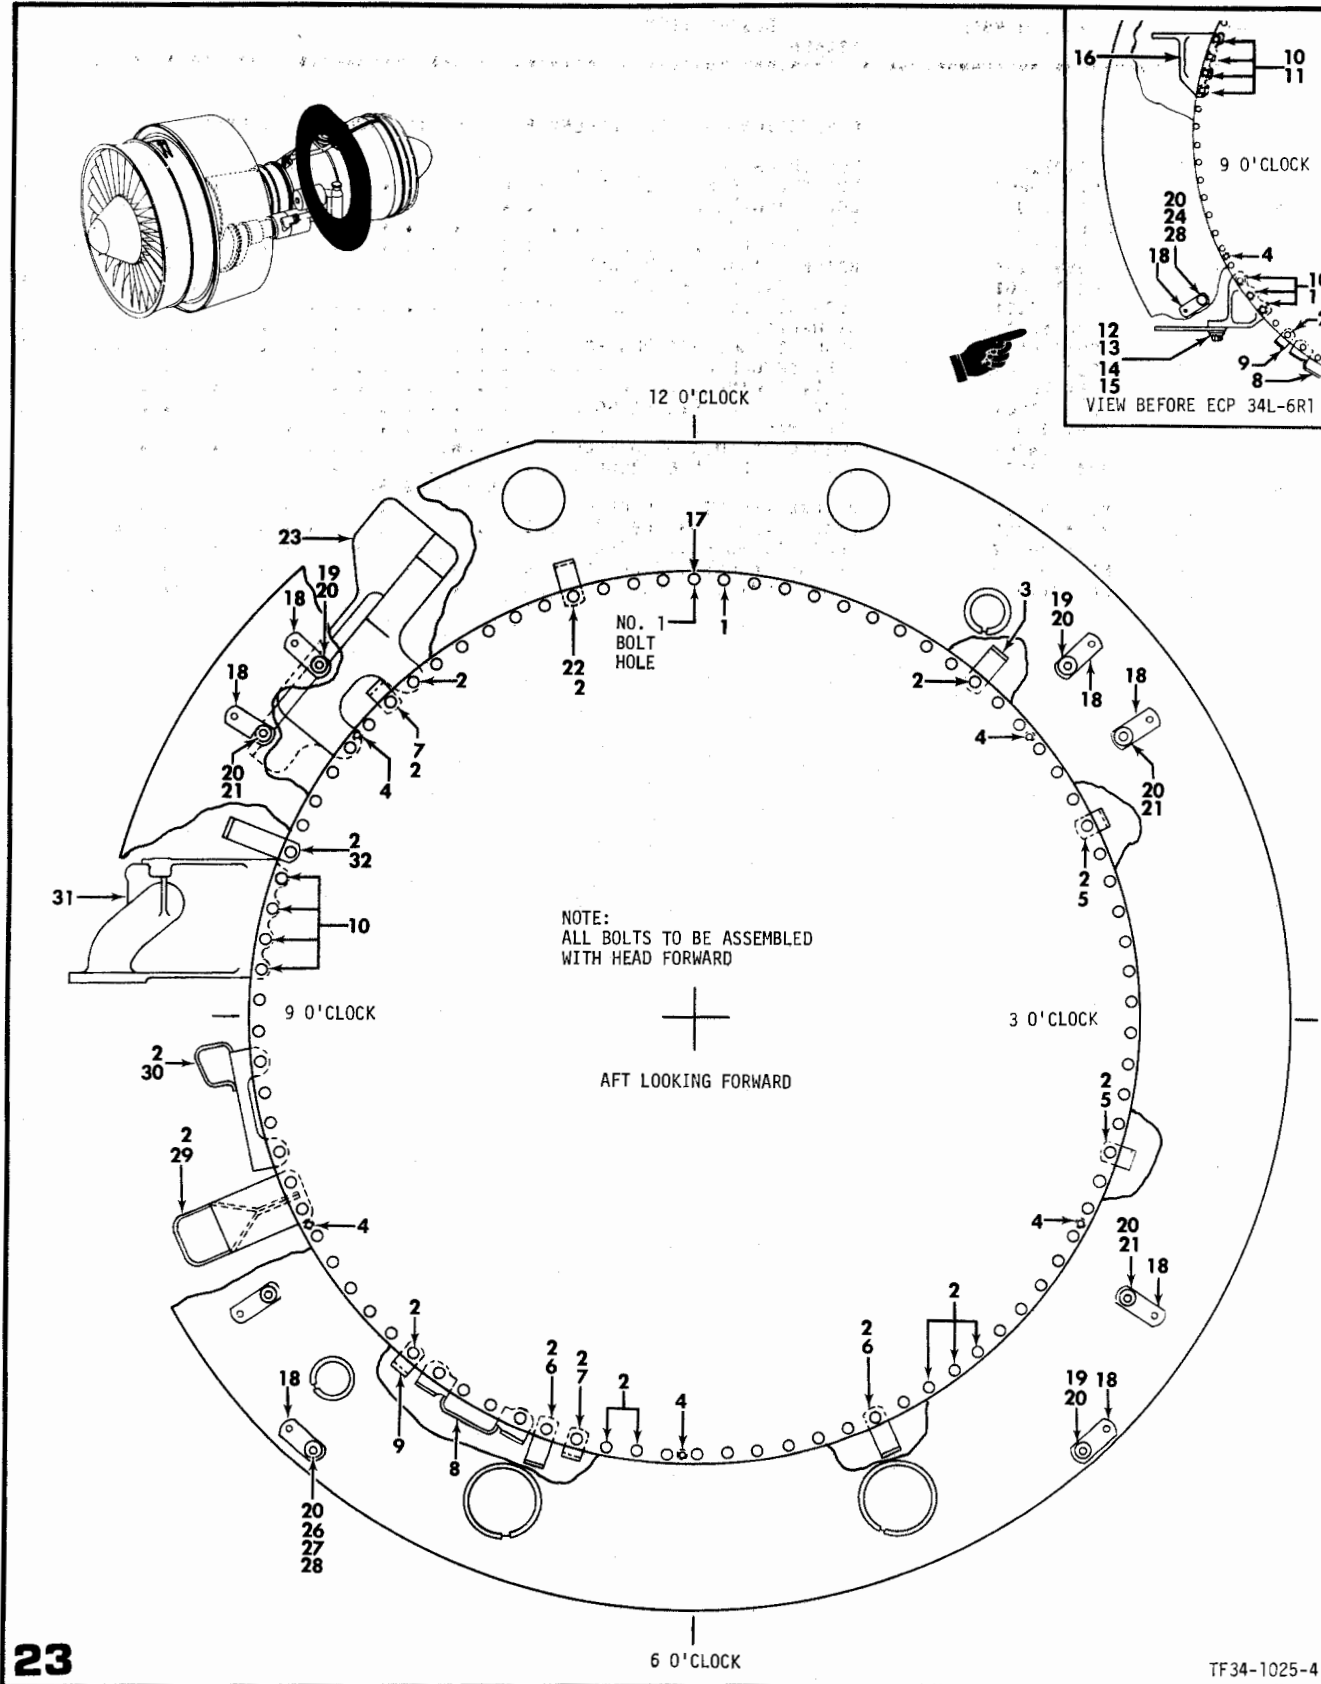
HIGH-PRESSURE TURBINE CASING TO COMBUSTION CHAMBER BOLTING DIAGRAM
